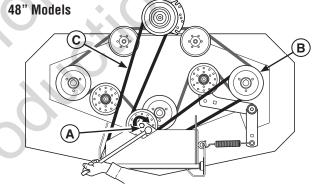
Removing the PTO Drive Belt A. Idler Arm
